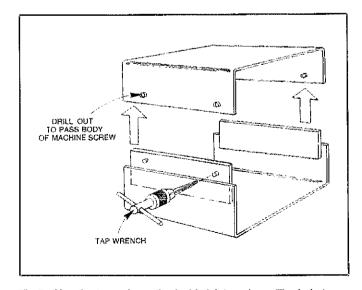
Use the tap only on the inside joining piece. The hole in the outer clamshell piece should allow the screw body to pass freely.
